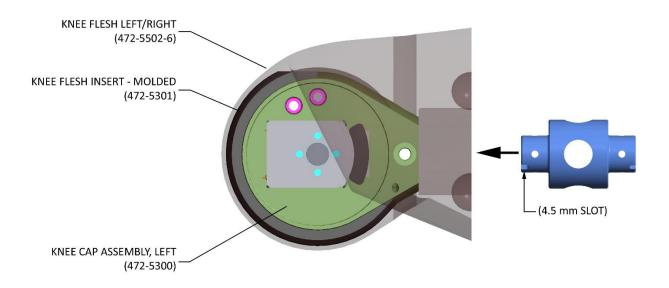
Assembling the Knee Flesh and Structural Replacement
